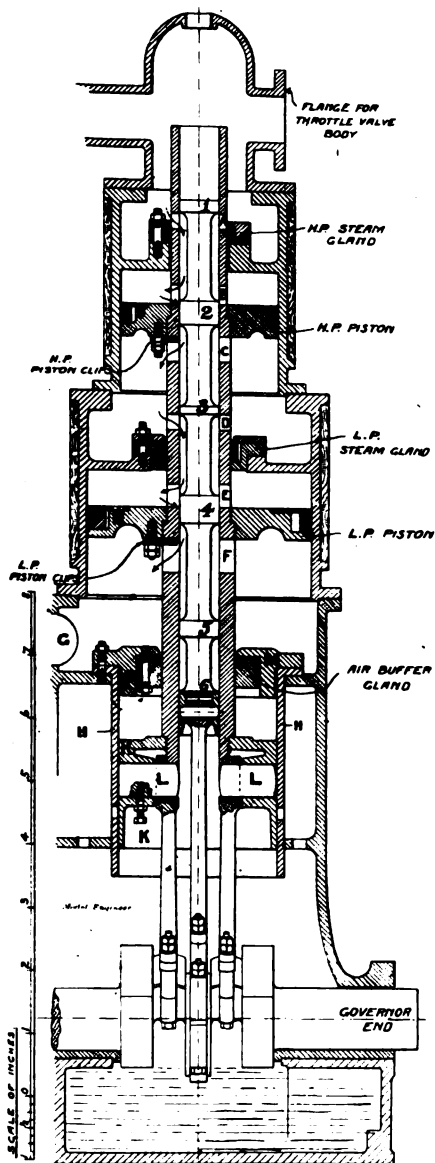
SECTION THROUGH ONE LINE OF MODEL "WILLANS" ENGINE.
